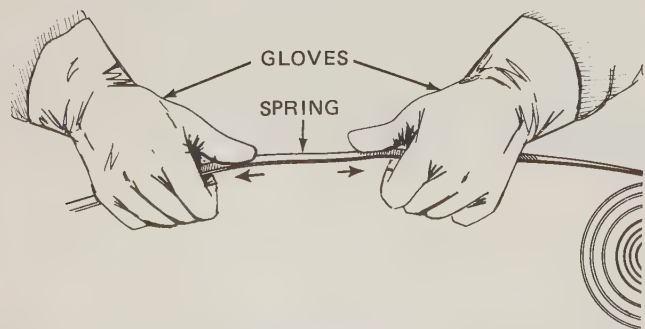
Straightening the spring to provide more tension. Wear gloves when handling the spring.
